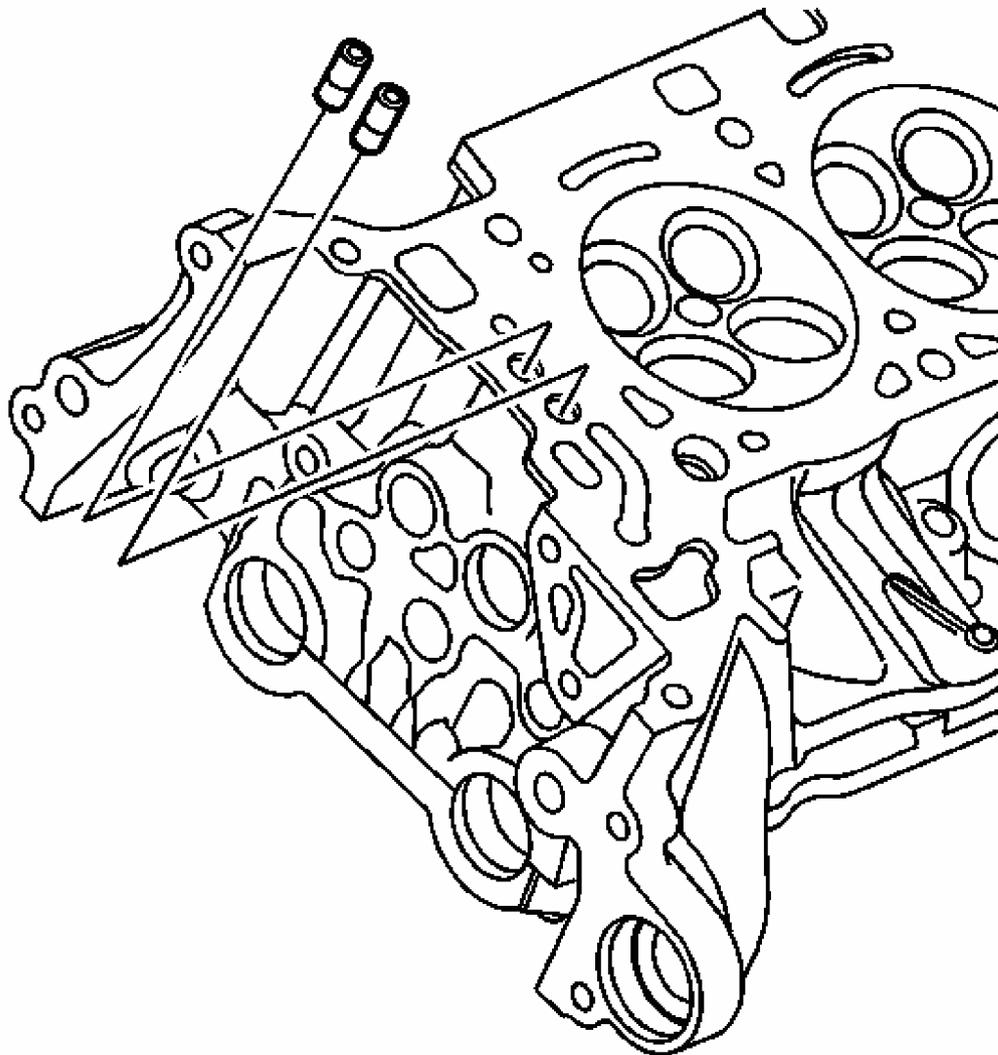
View Of Camshaft Position Actuator Oil Feed Check Valve
